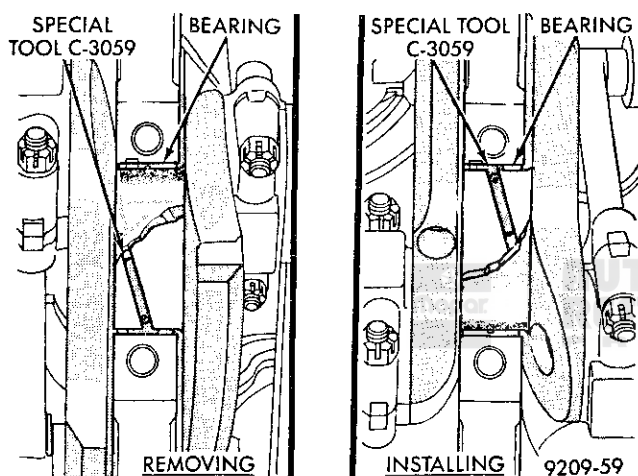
Upper Main Bearing Removal and Installation with Tool C-3059
